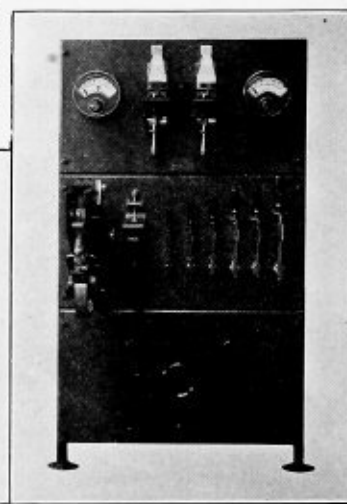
800-Ampere Arc Welding Generator Panel
